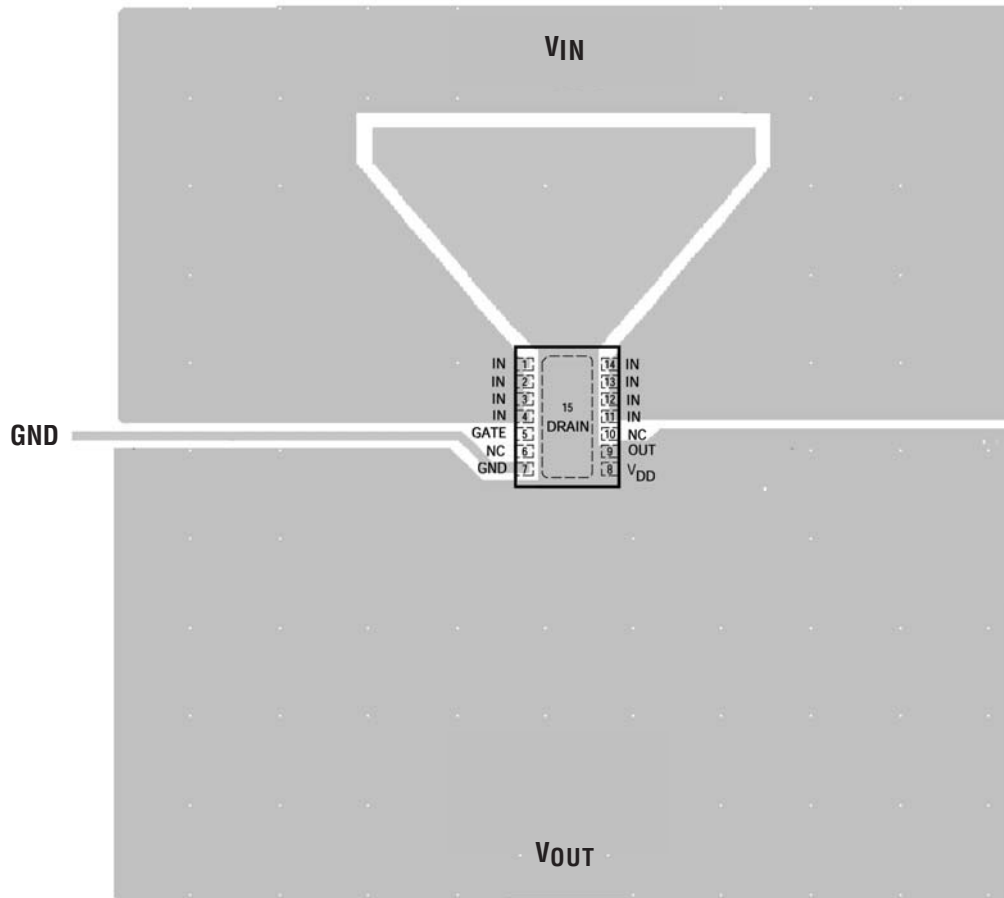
DFN Layout Considerations for 1" × 1" Single Sided PCB
